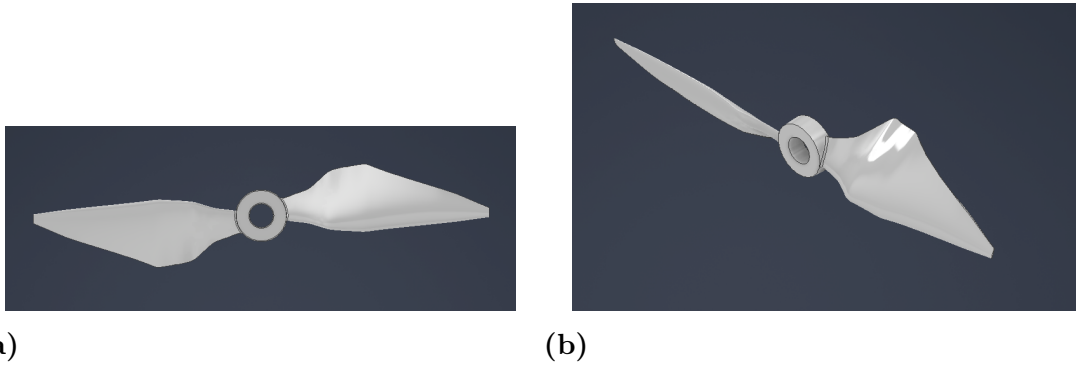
(a) Front view of propeller in CAD, (b) isometric view of the propeller in CAD.
